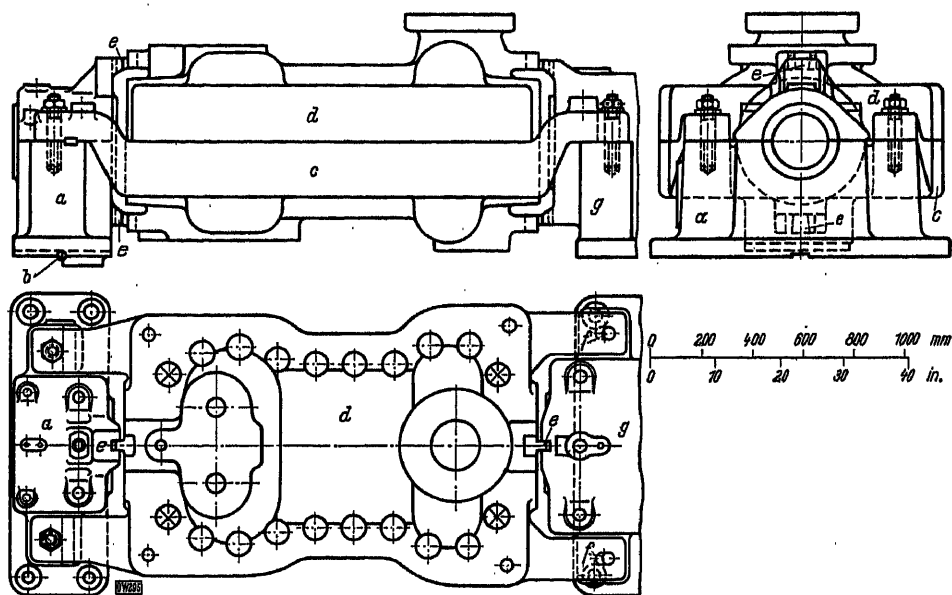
A.E.G., method of supporting the casing of a turbine for higher pressures on the bearing pedestal
